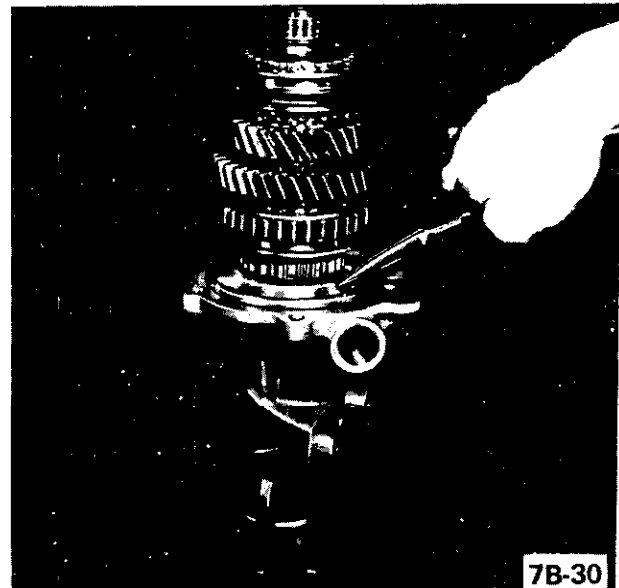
B-30 Removing Snap Ring From Rear Bearing Retainer
